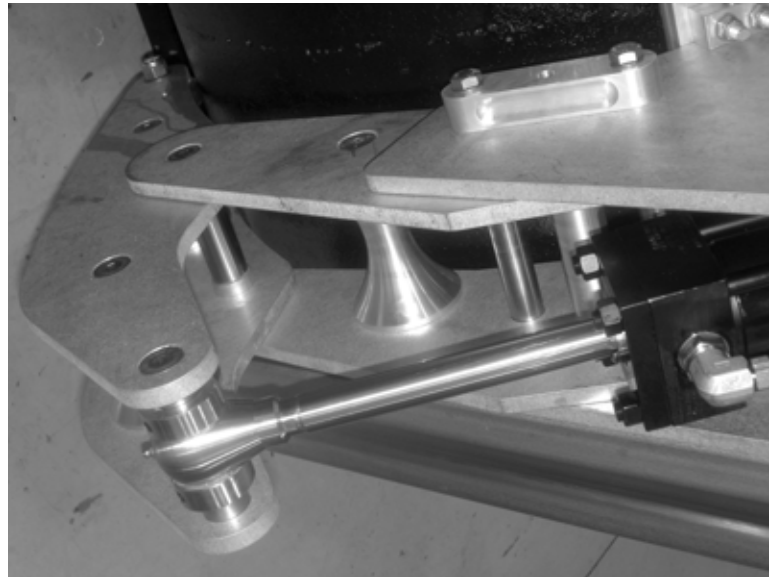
The photo shows the clamping cylinder extended and the clamp arm secured against the pipe.
